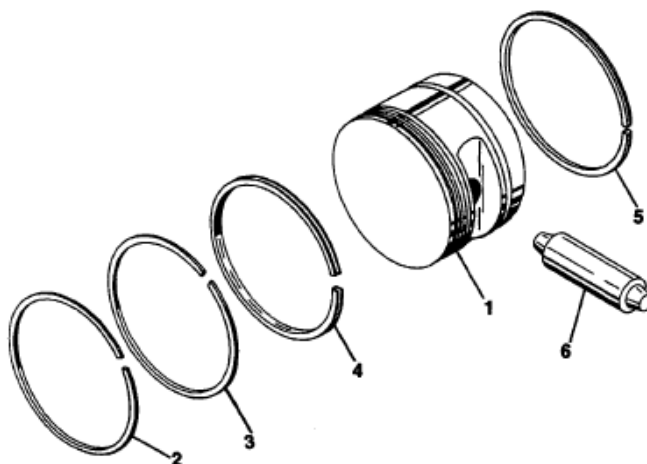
PISTON AND RING ASSEMBLY
